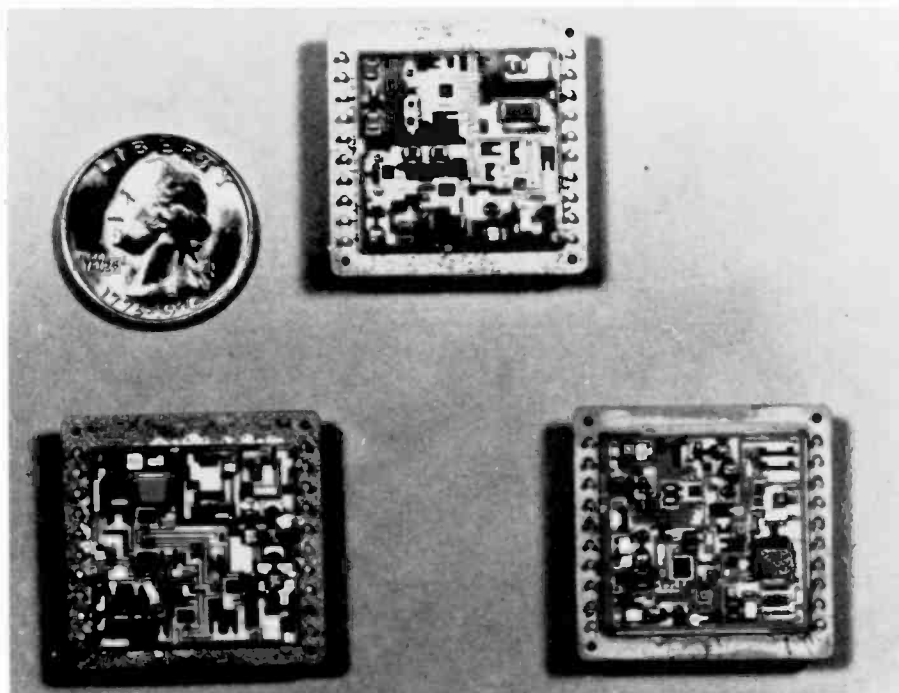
Most of the TV sensor circuits are contained within six custom-designed hybrid microcircuits. Three of these rugged packages are shown with covers removed.
